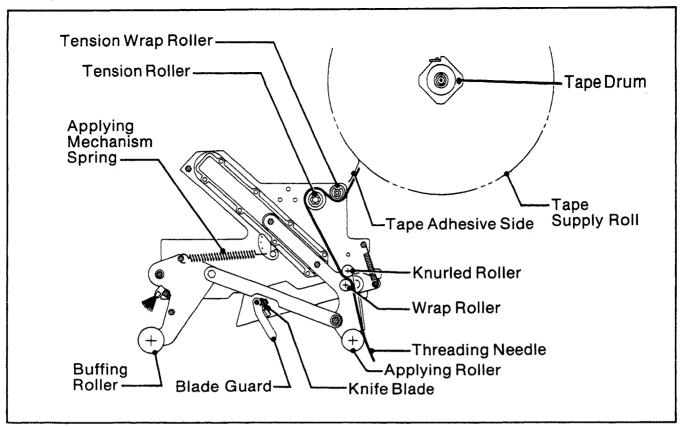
Tape Threading Diagram - Top Taping Head - Left Side View
